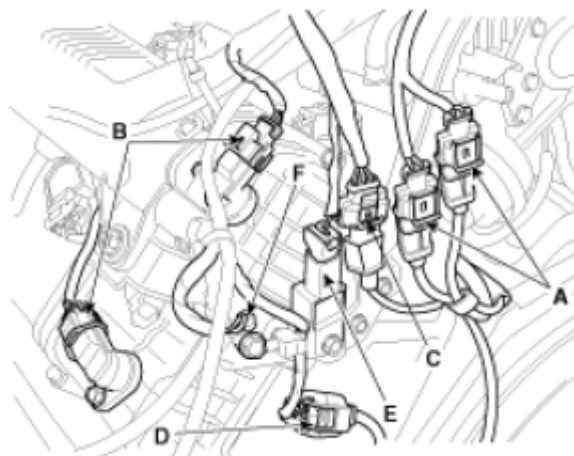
Identifying Knock Sensor, Camshaft Position Sensor, Crankshaft Position Sensor, Oxygen Sensor, Condenser Connectors And Ground Line
